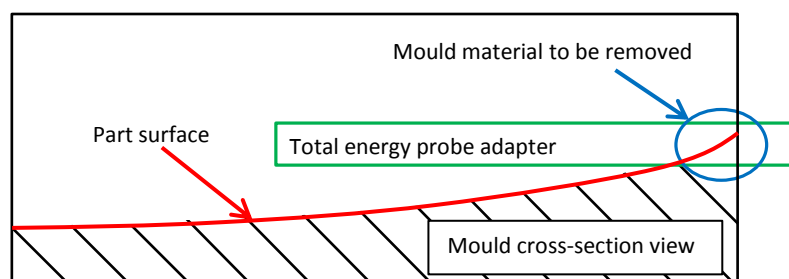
Small area on the mould removed to make space for the placement of the total energy probe adapter during part manufacturing
